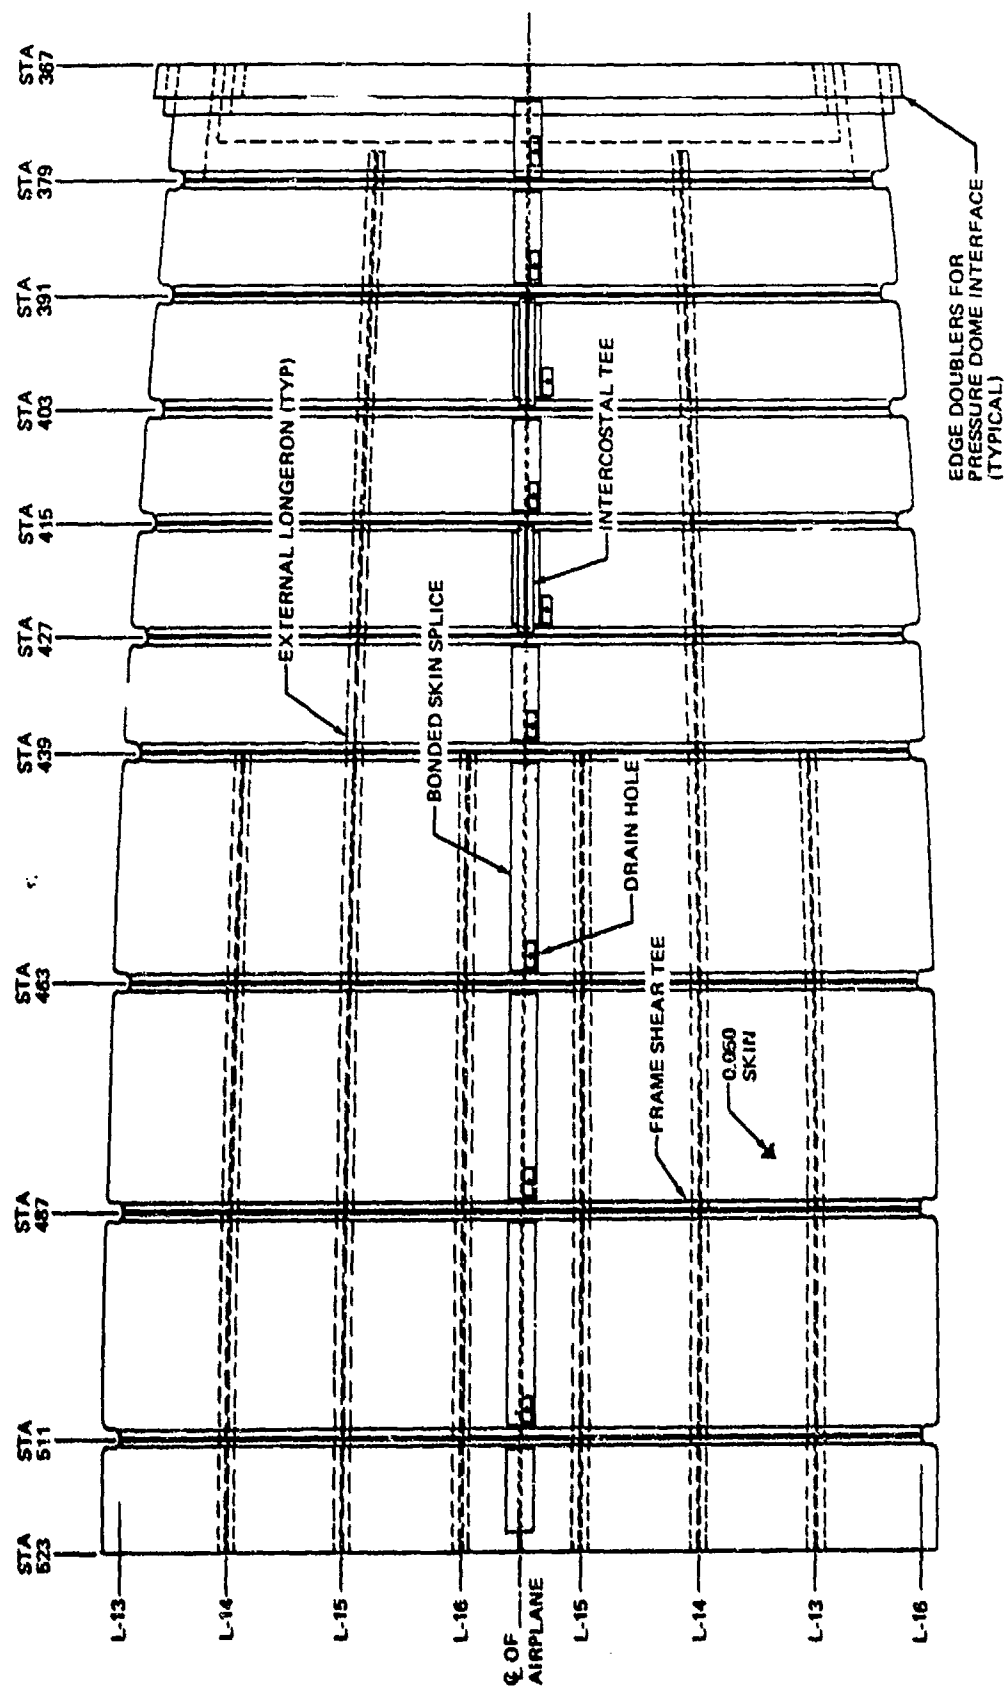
NONCONSTANT SECTION EXTERNAL LONGERON PANEL
